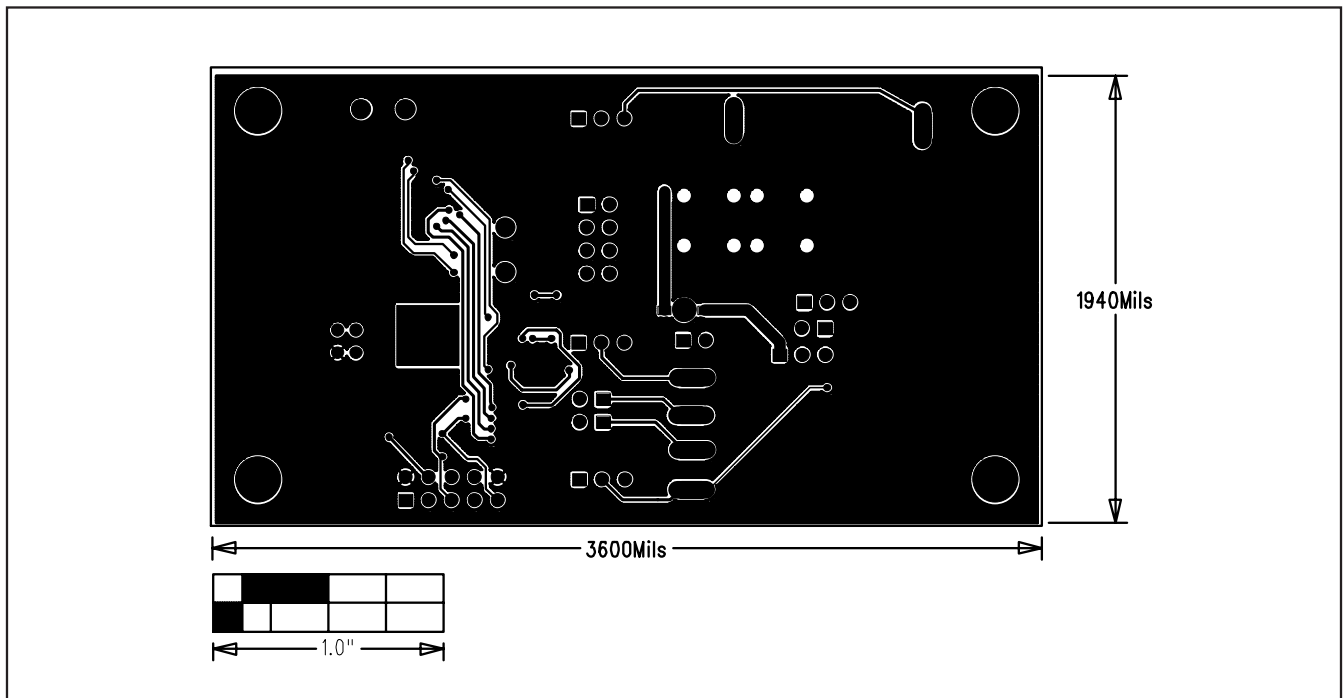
MAX8834Y EV Kit PCB Layout—Bottom Layer
